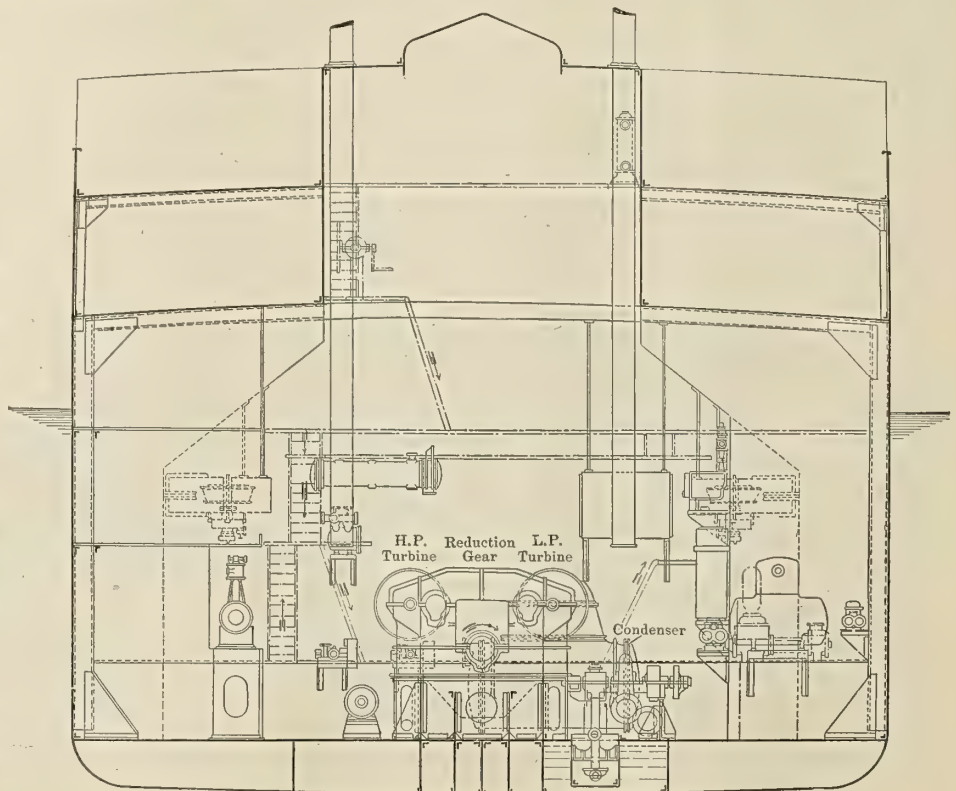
Section Through Engine Room, 3,000 Horsepower Cargo Steamer
